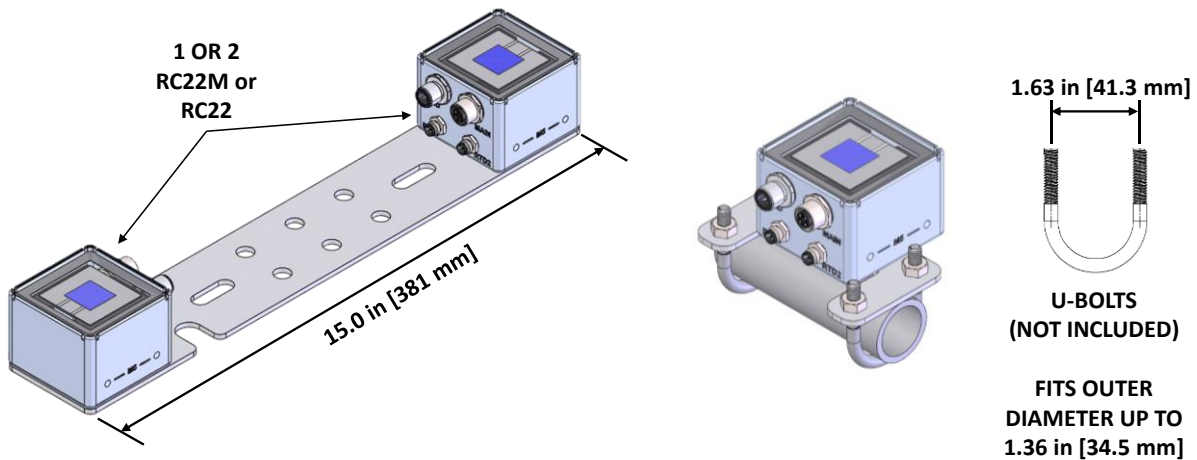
Left: dual mounting plate (610533). Right: Tube mounting plate (610493)
